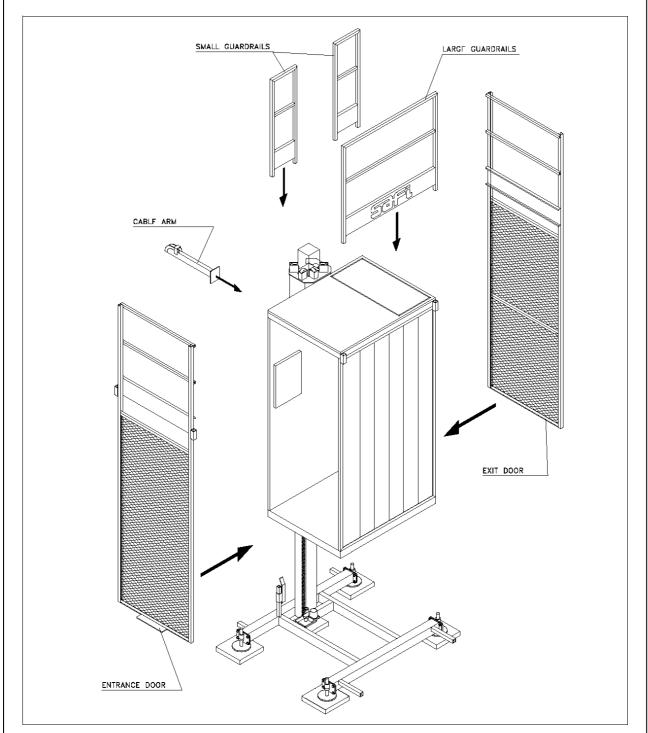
Assembly of doors, guardrail, cable arm
